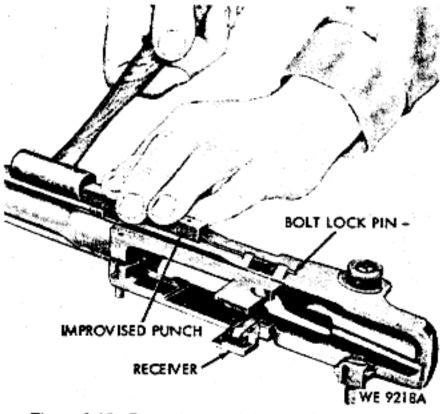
Removing retaining pin from bolt lock using improvised bolt lock retaining pin punch.
